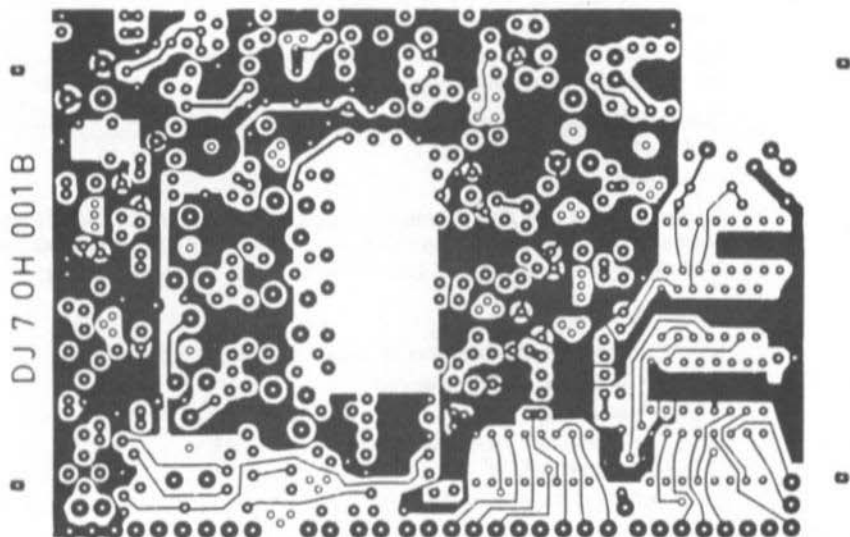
Synthesizer PC-board DJ 7 OH 001, with through-contacts
